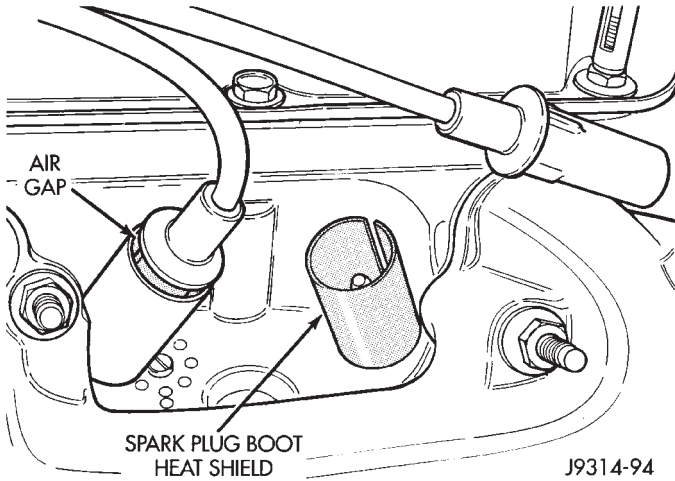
Heat Shields—5.2L/5.9LV-8 Engines
